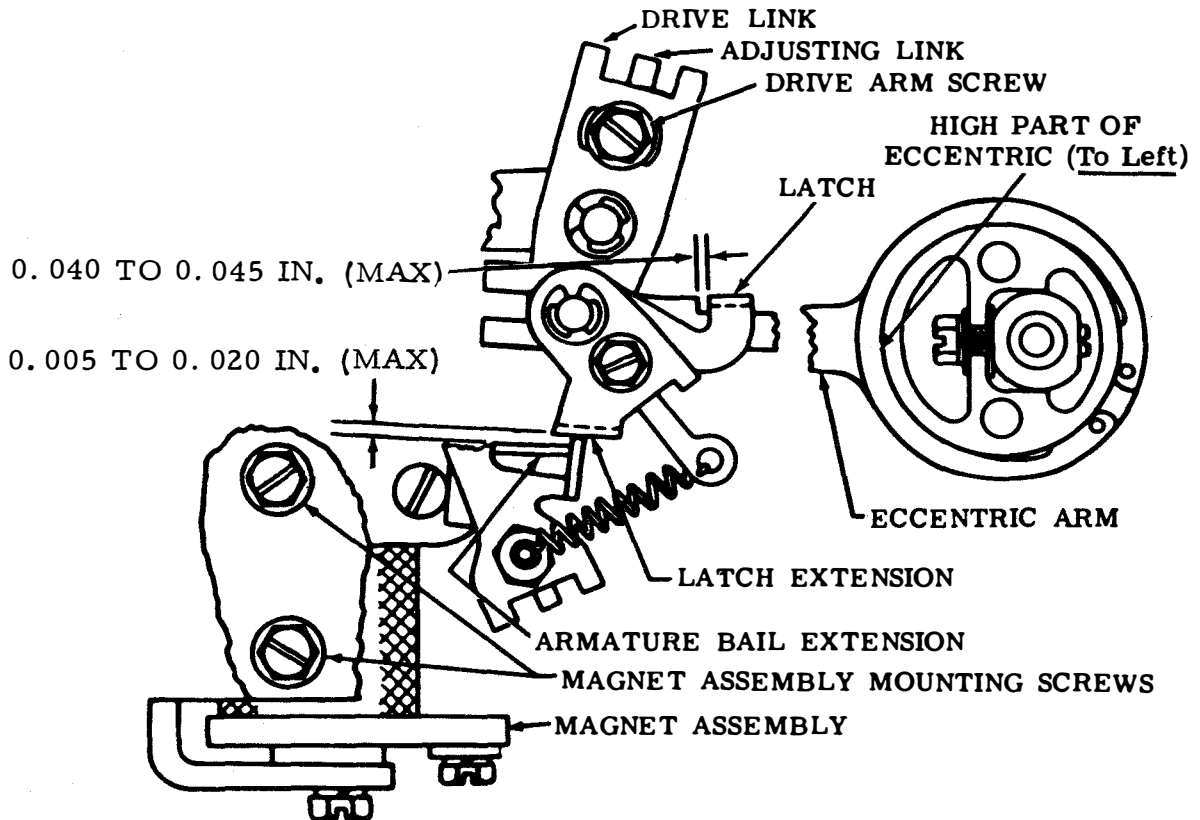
Drive Link and Latch Extension (For Fully Perforated Tape), Reperfector
